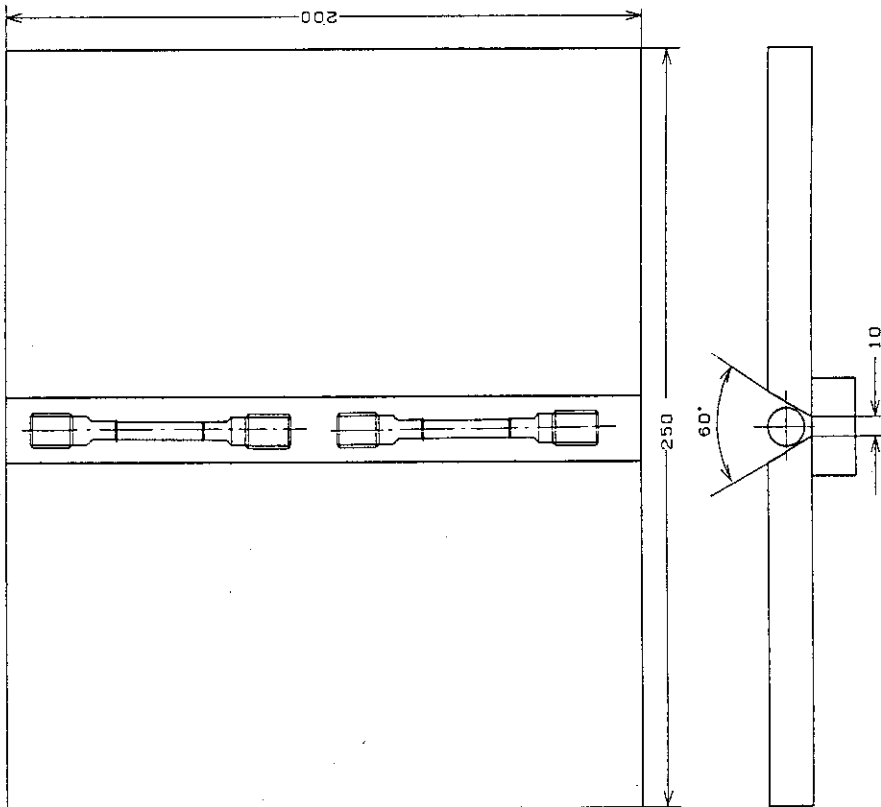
Groove geometry and method of sampling for weld metal specimen
